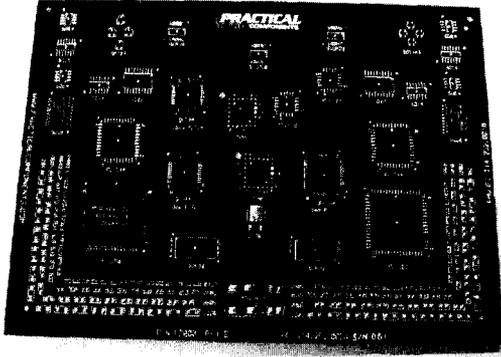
Bottom view of the test PWB assembled using Sn95.5Ag3.8Cu0.7
